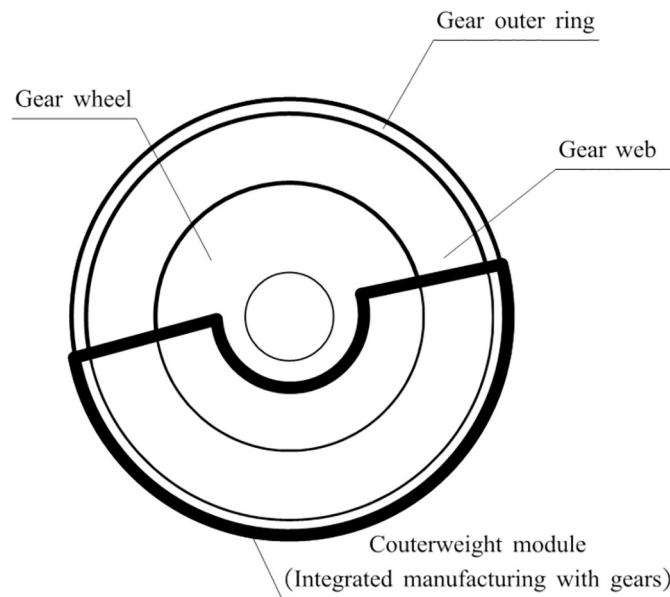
The structure of driven gear in the three-cylinder engine balancing system.
